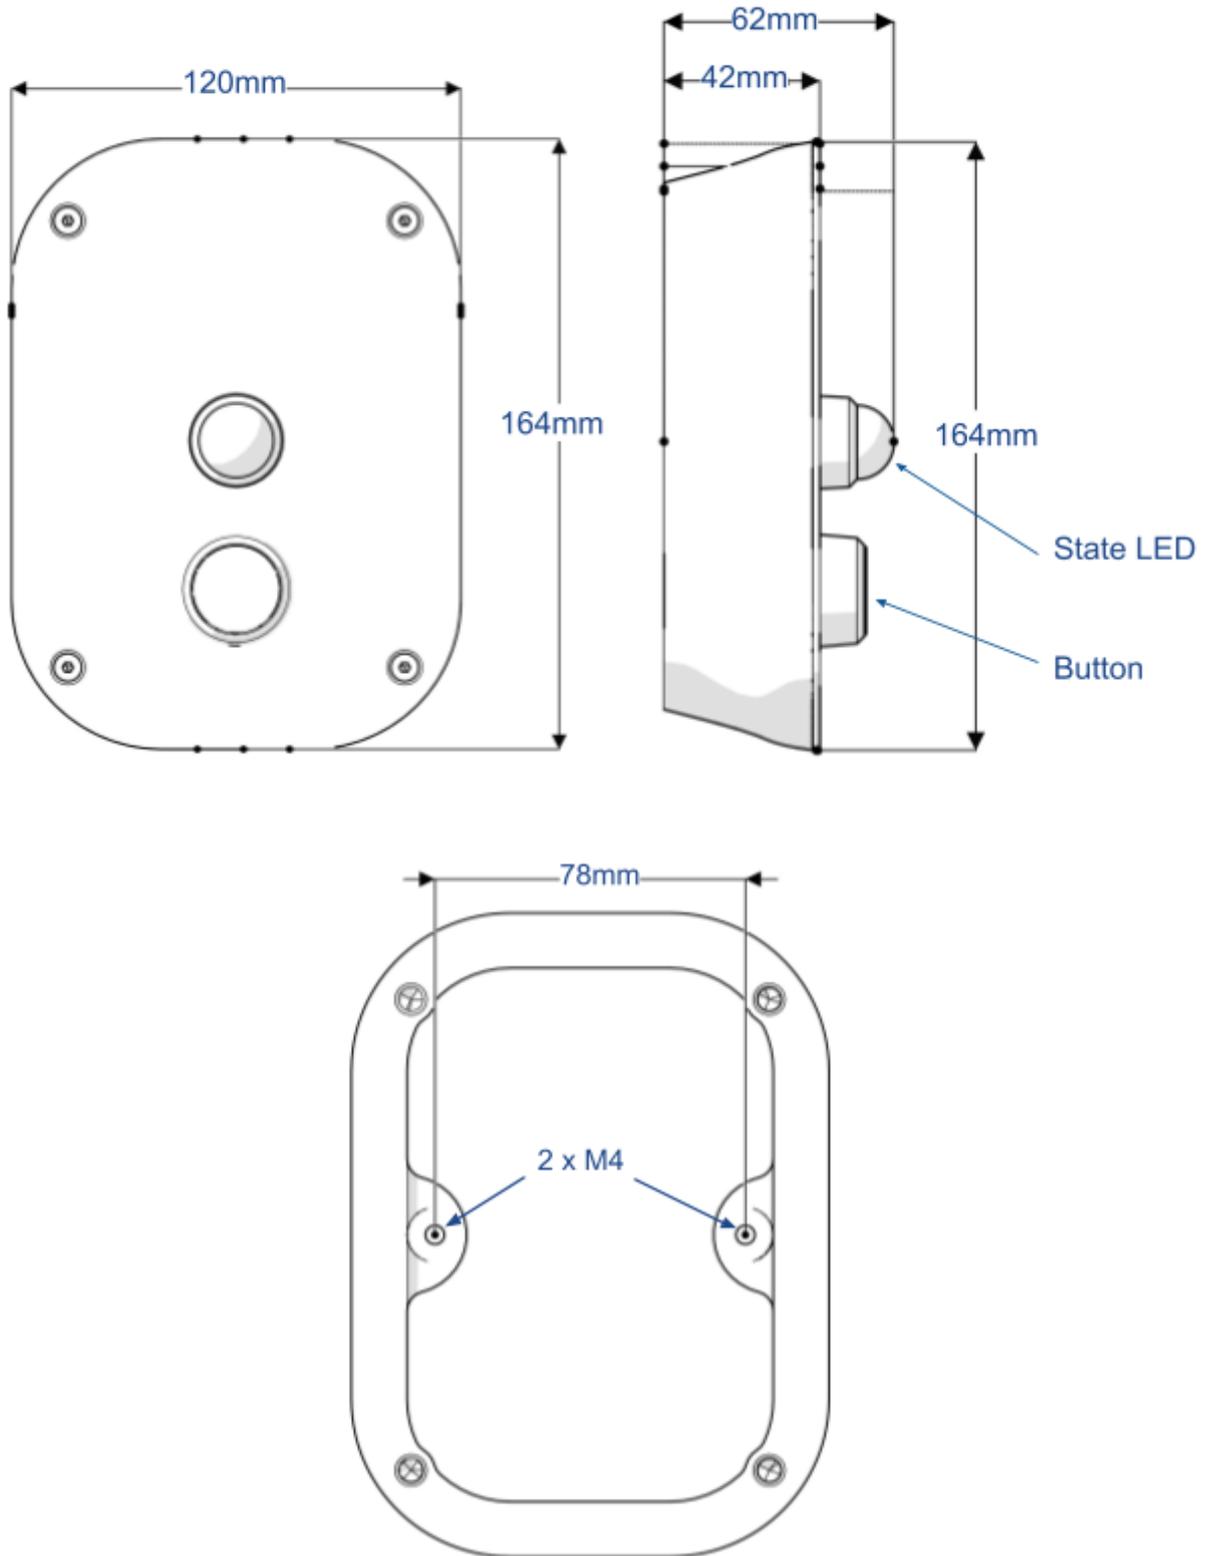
Overall dimensions and measurements of the 2 holes for the installation of the control panel. The two holes with center distance 78 mm for M4 screws allow to install the control panel to the wall through two screw anchors diam. 6 mm.
